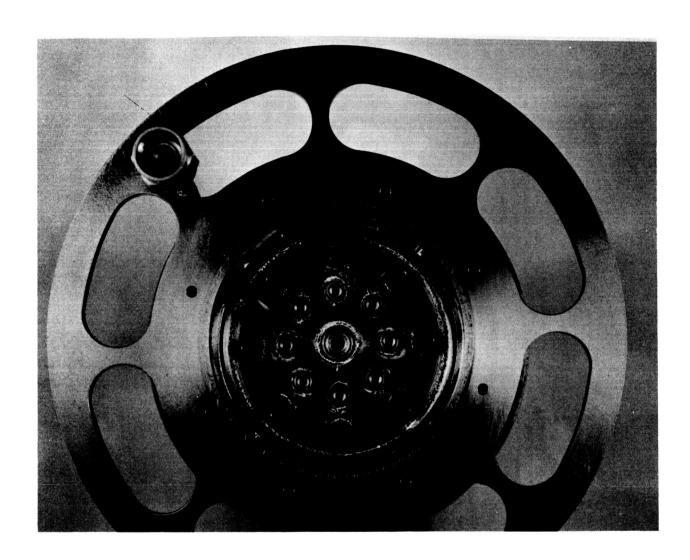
100-lb Injector After Electron Beam Welding
